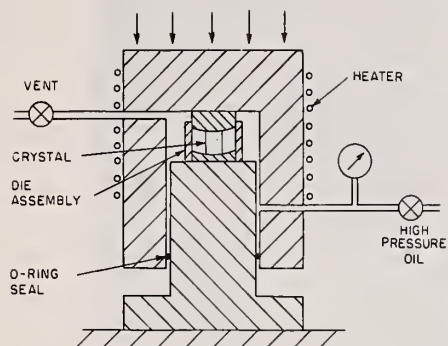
A sectional view of the isostatic forging chamber with the closed die in place.
